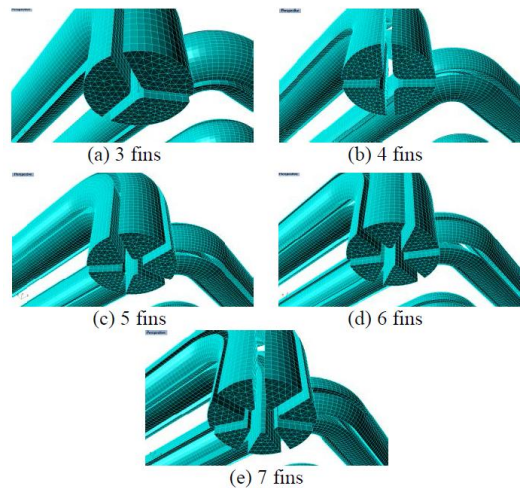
Conformal mold cooling by using fin concept (Source: [5])
